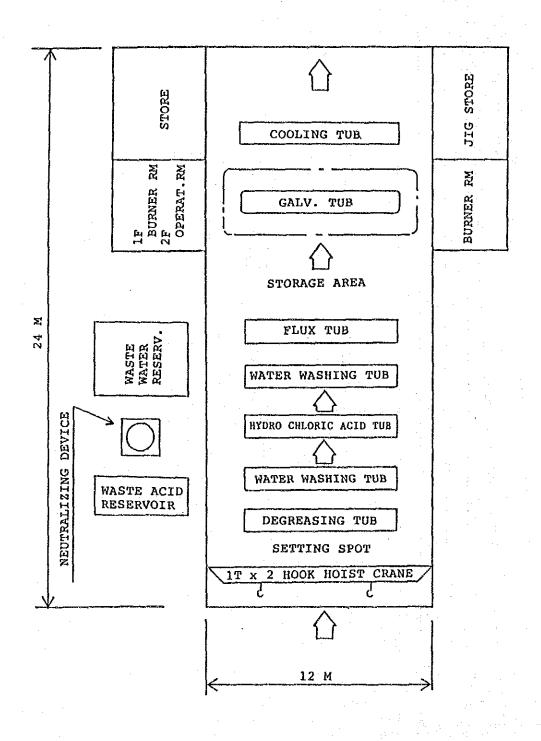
General Arrangement of Galvanizing Shop
